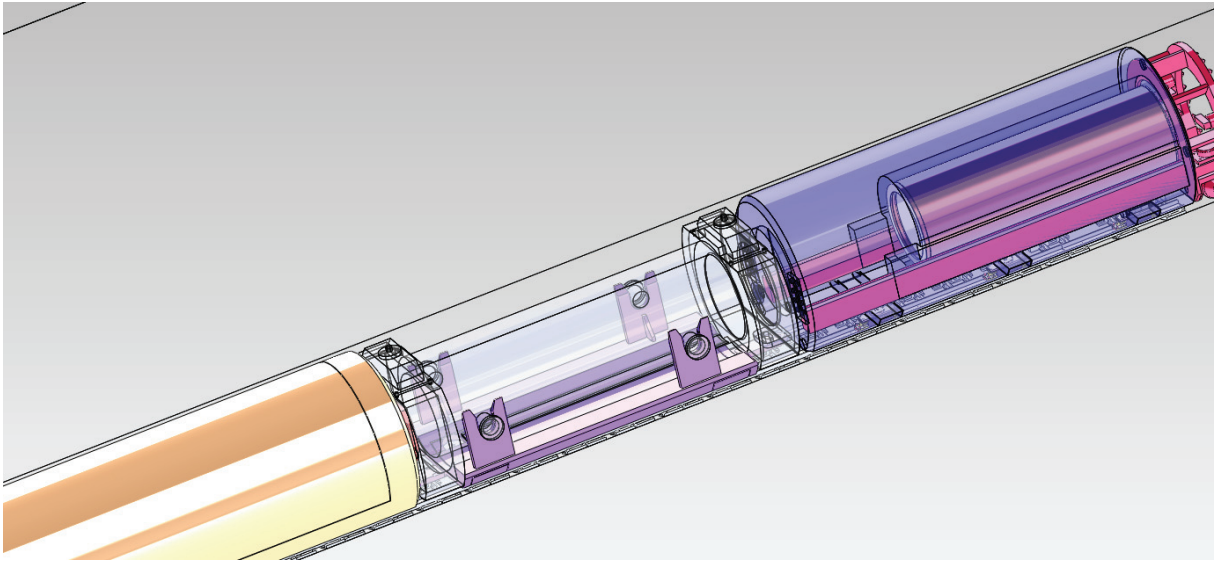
The Power Ram is aligned with the transfer cask and retrieval machine Guide Cylinder.
